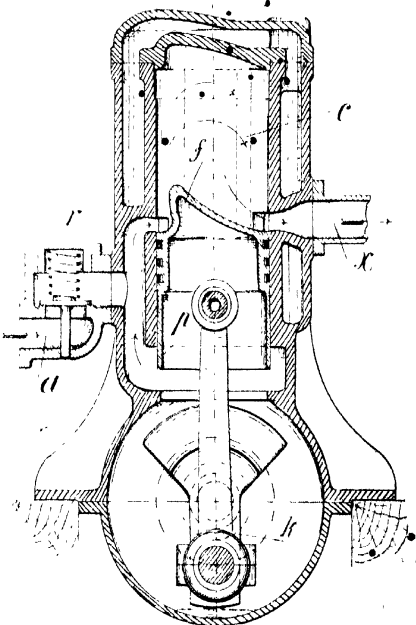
A.—Common type of valveless, two-stroke engine with deflecting plate on end of piston.
